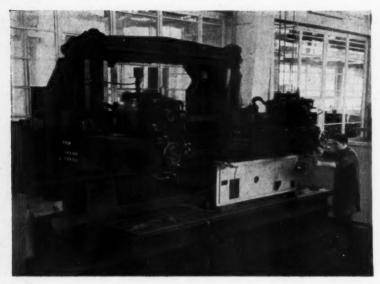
This Zeiss special plano-milling machine was one of the few machines left behind by the Russians when the plant was dismantled for war reparations
